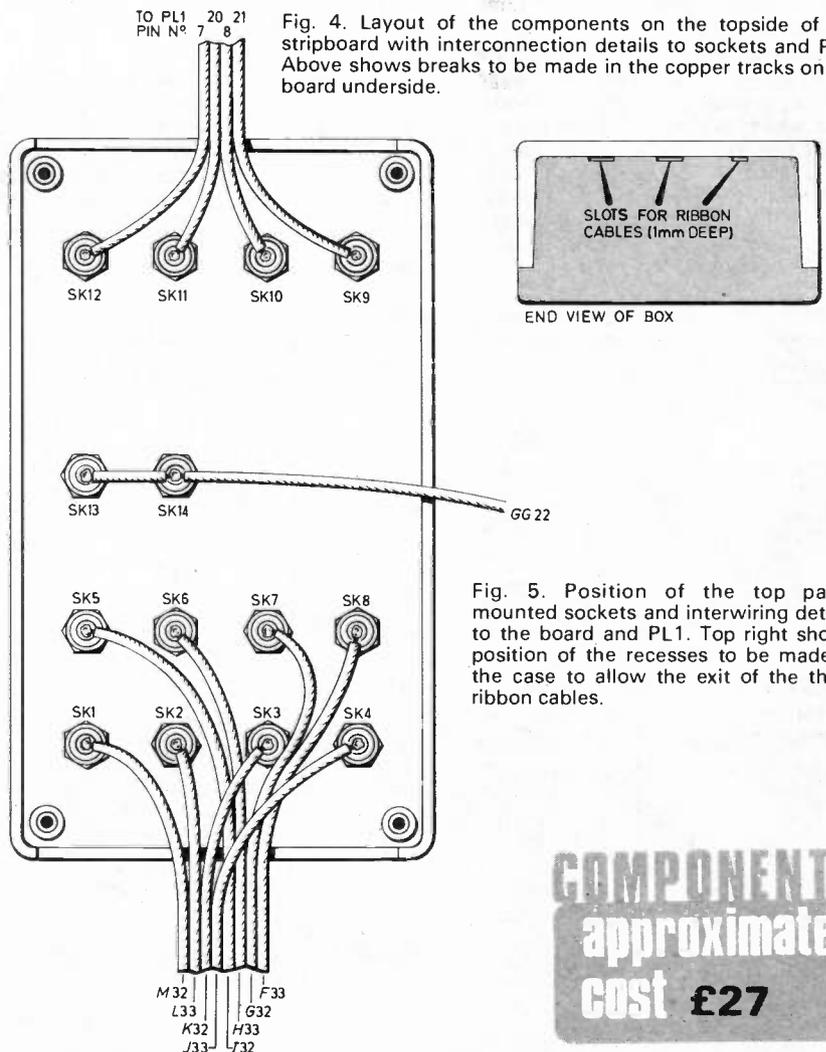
Position of the top panel mounted sockets and interwiring details to the board and PL1. Top right shows position of the recesses to be made in the case to allow the exit of the three ribbon cables.
